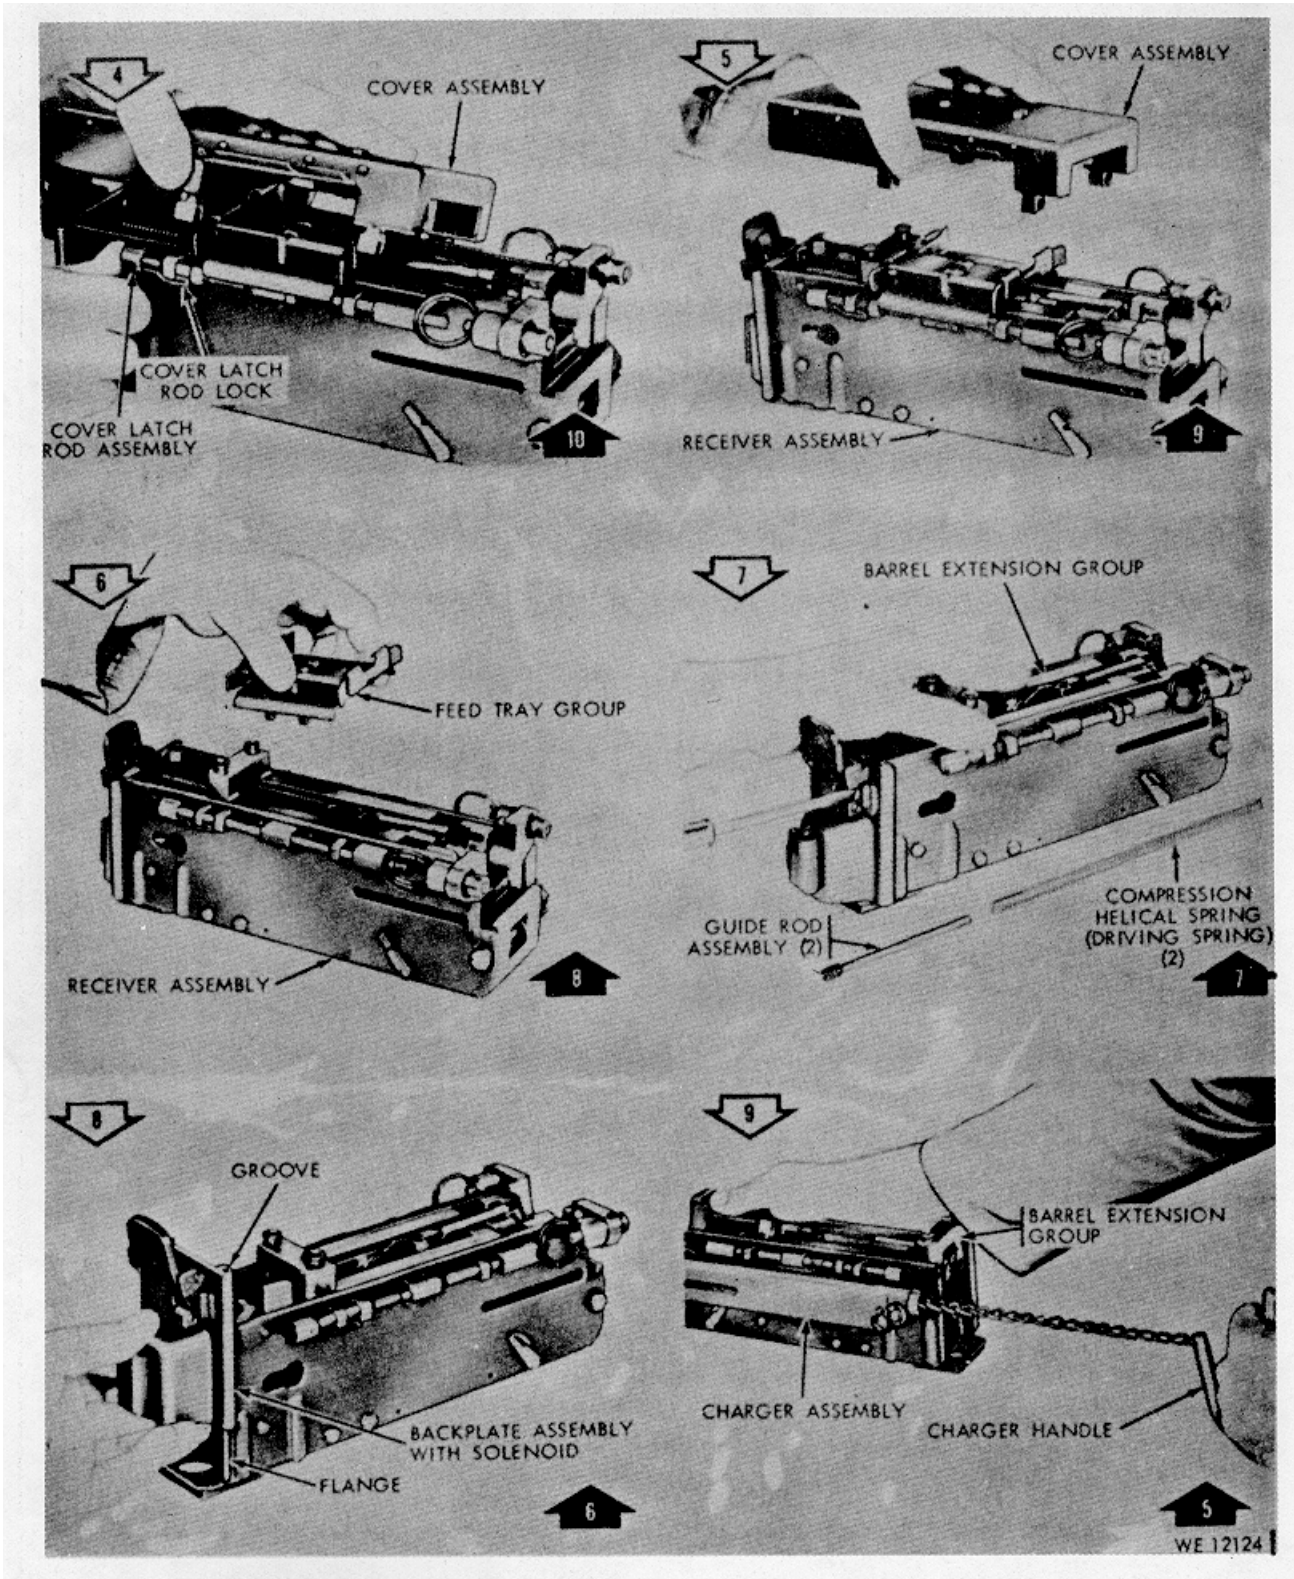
Disassembly/assembly - 7.62mm machine gun (3 of 4).
